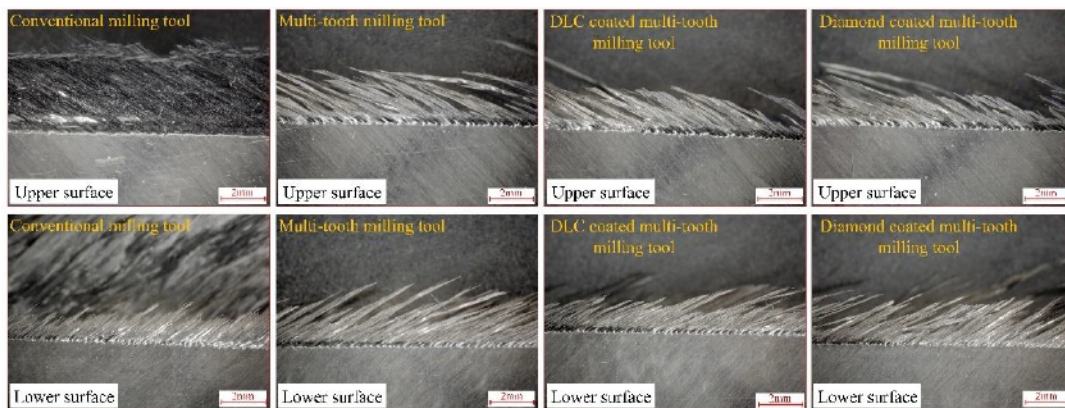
The burrs at upper surface and lower surface of the CFRP workpiece with different tools (VB: 0.1 mm)
